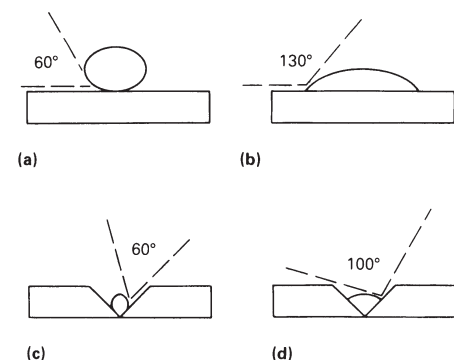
Acceptable (b and d) and unacceptable (a and c) wetting profiles for nickel alloy weldments. (a) and (b) Overlay welds. (c) and (d) Butt welds
